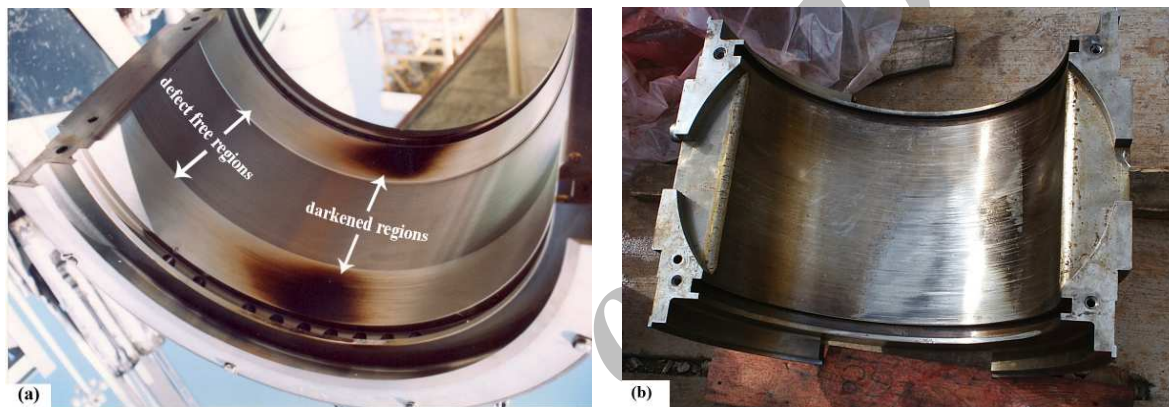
a) Upper half of the bearing, b) and bottom half of the bearing
